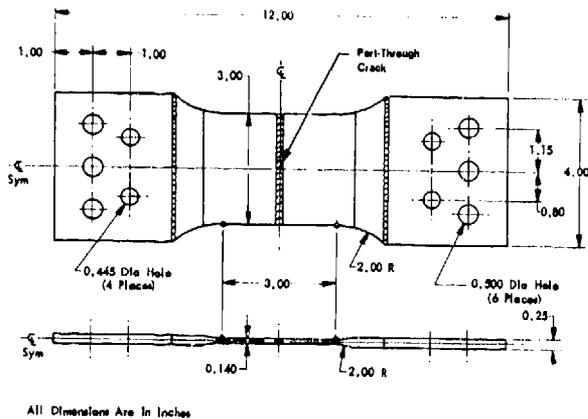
SPECIMEN DESIGN FOR PART-THROUGH-CRACKED WELDS IN SPECIMENS OF ALLOY 718(15)
